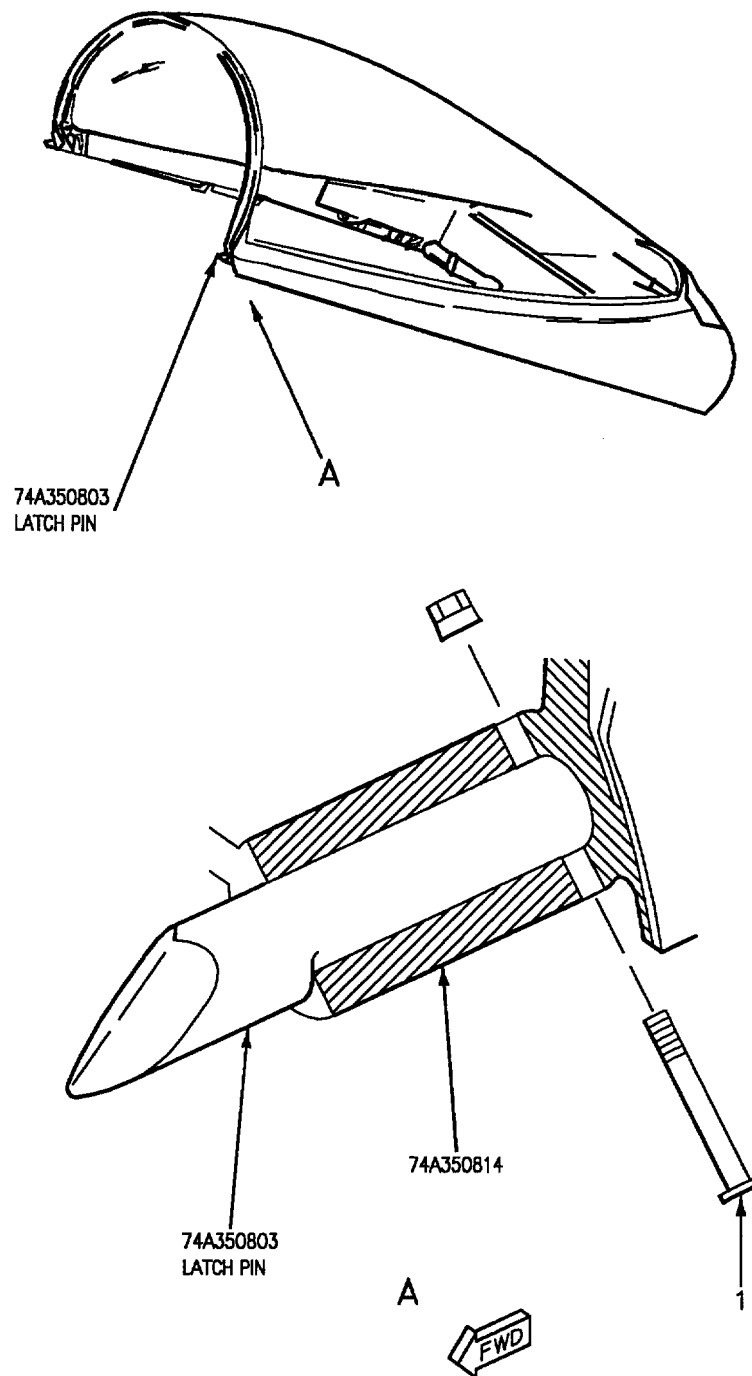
Latch No. 1, Fastener Index (Sheet 1)
